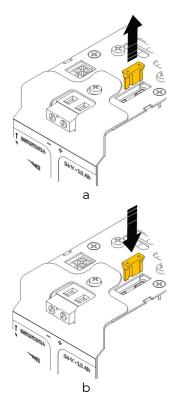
BBX Battery box – a) Removing and b) Inserting fuse
